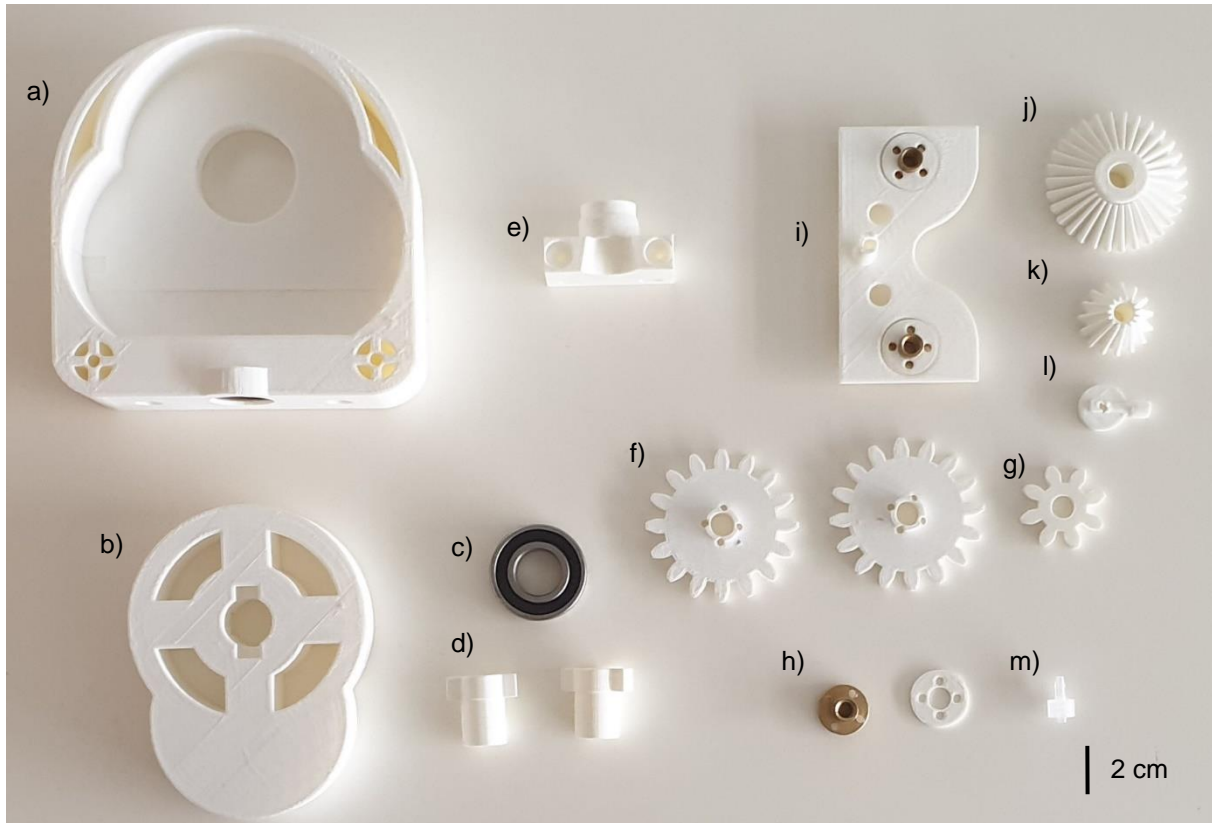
3D printed components of the bioreactor; a) main Bioreactor chamber; b) Cam actuator; c) Ball-bearing for the actuator axle; d) Actuator axle parts; e) Secondary chamber; f) bigger flat gear; g) smaller flat gear h) Nuts; i) Positioning system base; j) bigger bevel gear ; k) smaller bevel gear; l) bevel gear support; m) tubing fitting.
